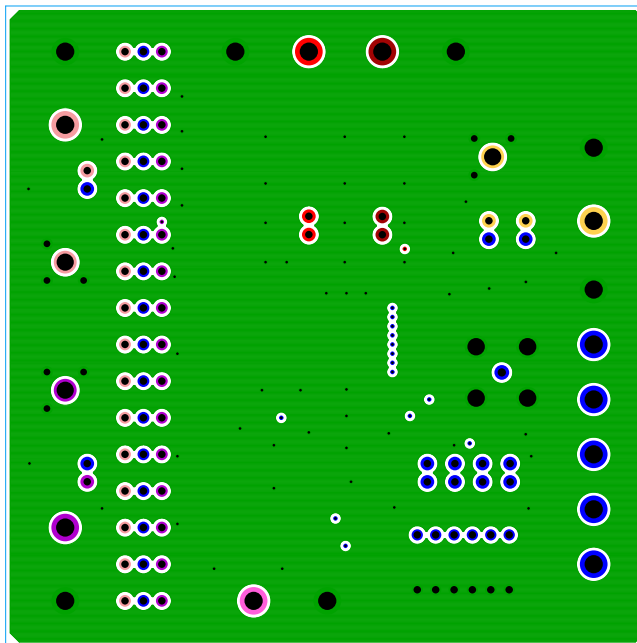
PCB - INNER LAYER 1 (TOP VIEW)
